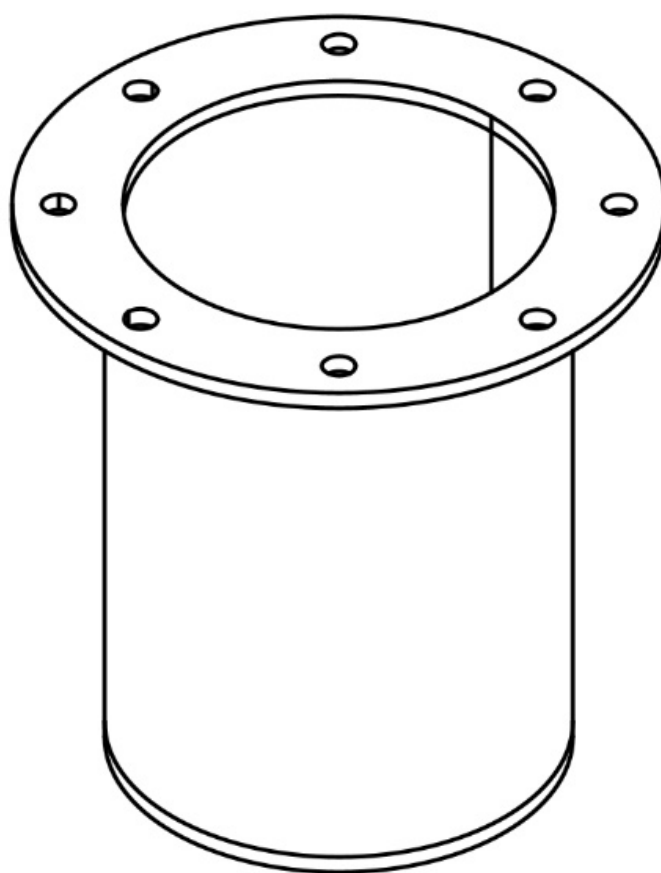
Technical drawing of the casing of the process control module with an oblique front view.
